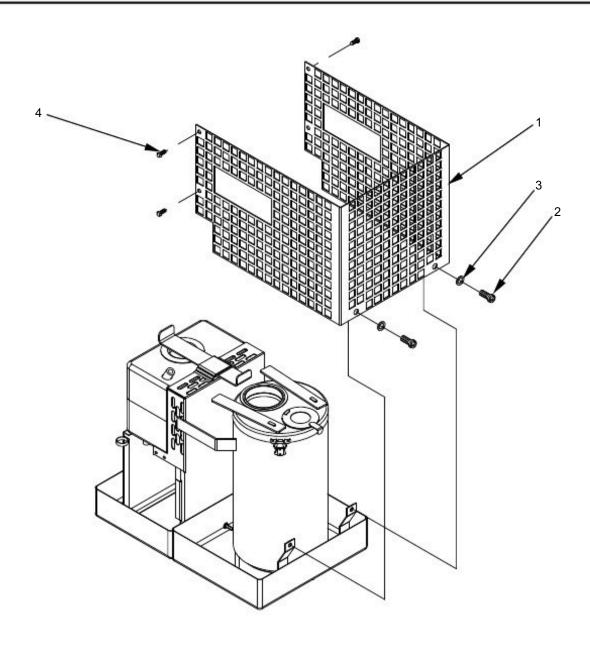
Group 10 Heat Shield Assembly 0040 00-(1 Blank)/2
